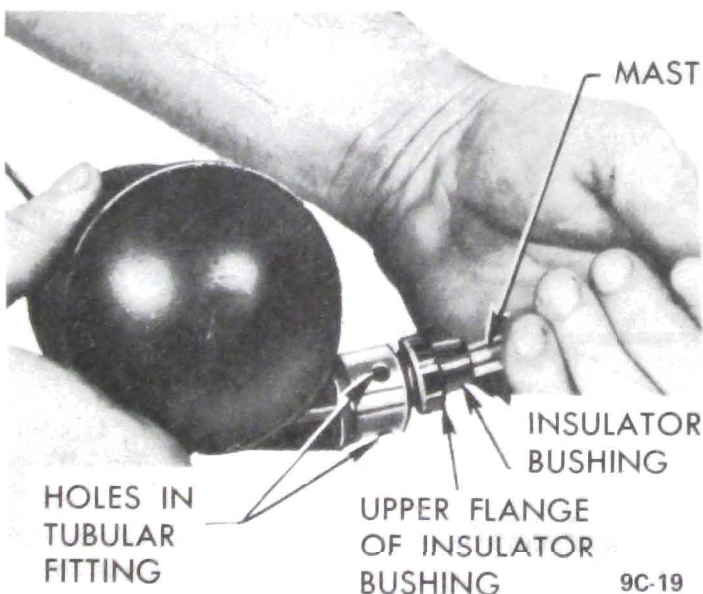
C-2 Removing or Installing Mast and Insulator Bushing
